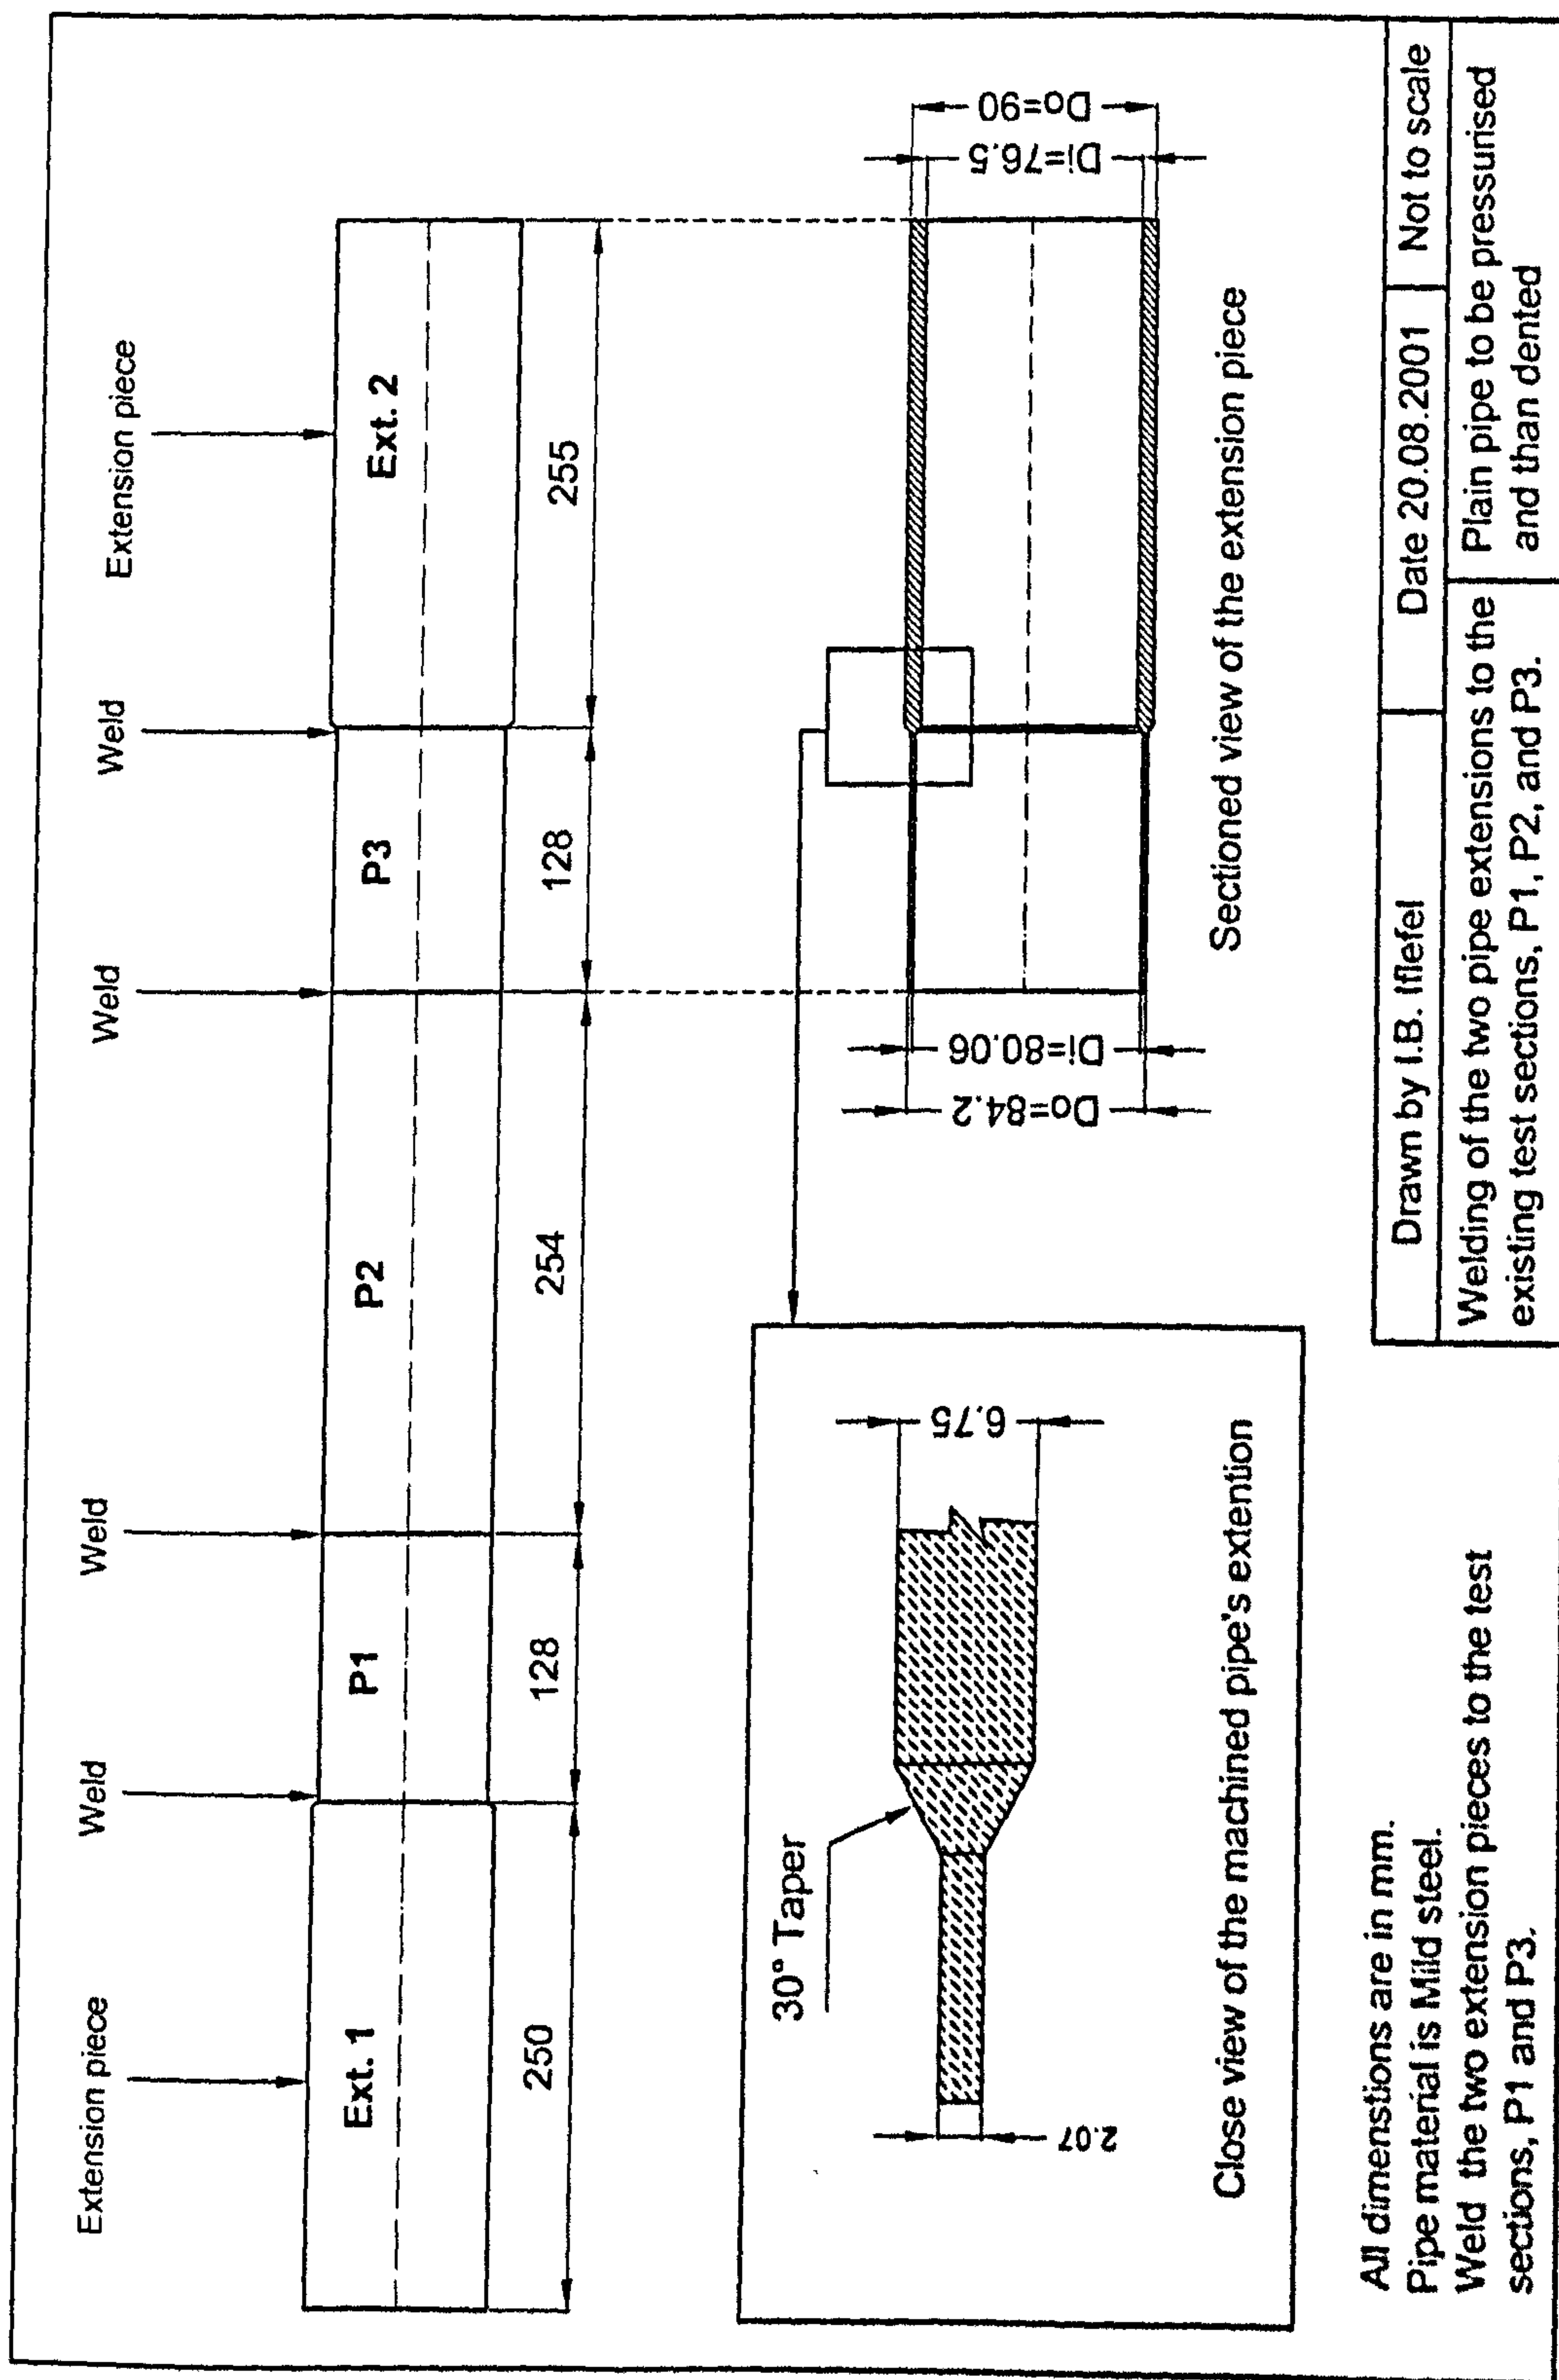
Details about welding of test specimens P1, P2, P3, and extensions (according to modified BS 5500 Fig E2(a) [70]).
